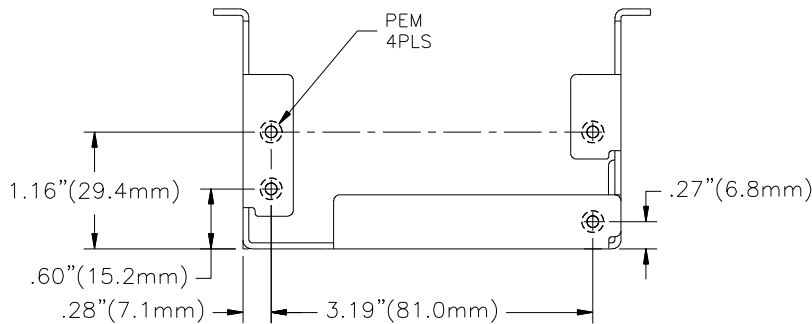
Main Chassis Mounting: Rear of “Core” Printer
